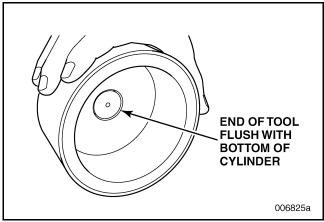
Installer/Sizer Tool Fully Inserted and End Flush with Bottom of Cylinder
